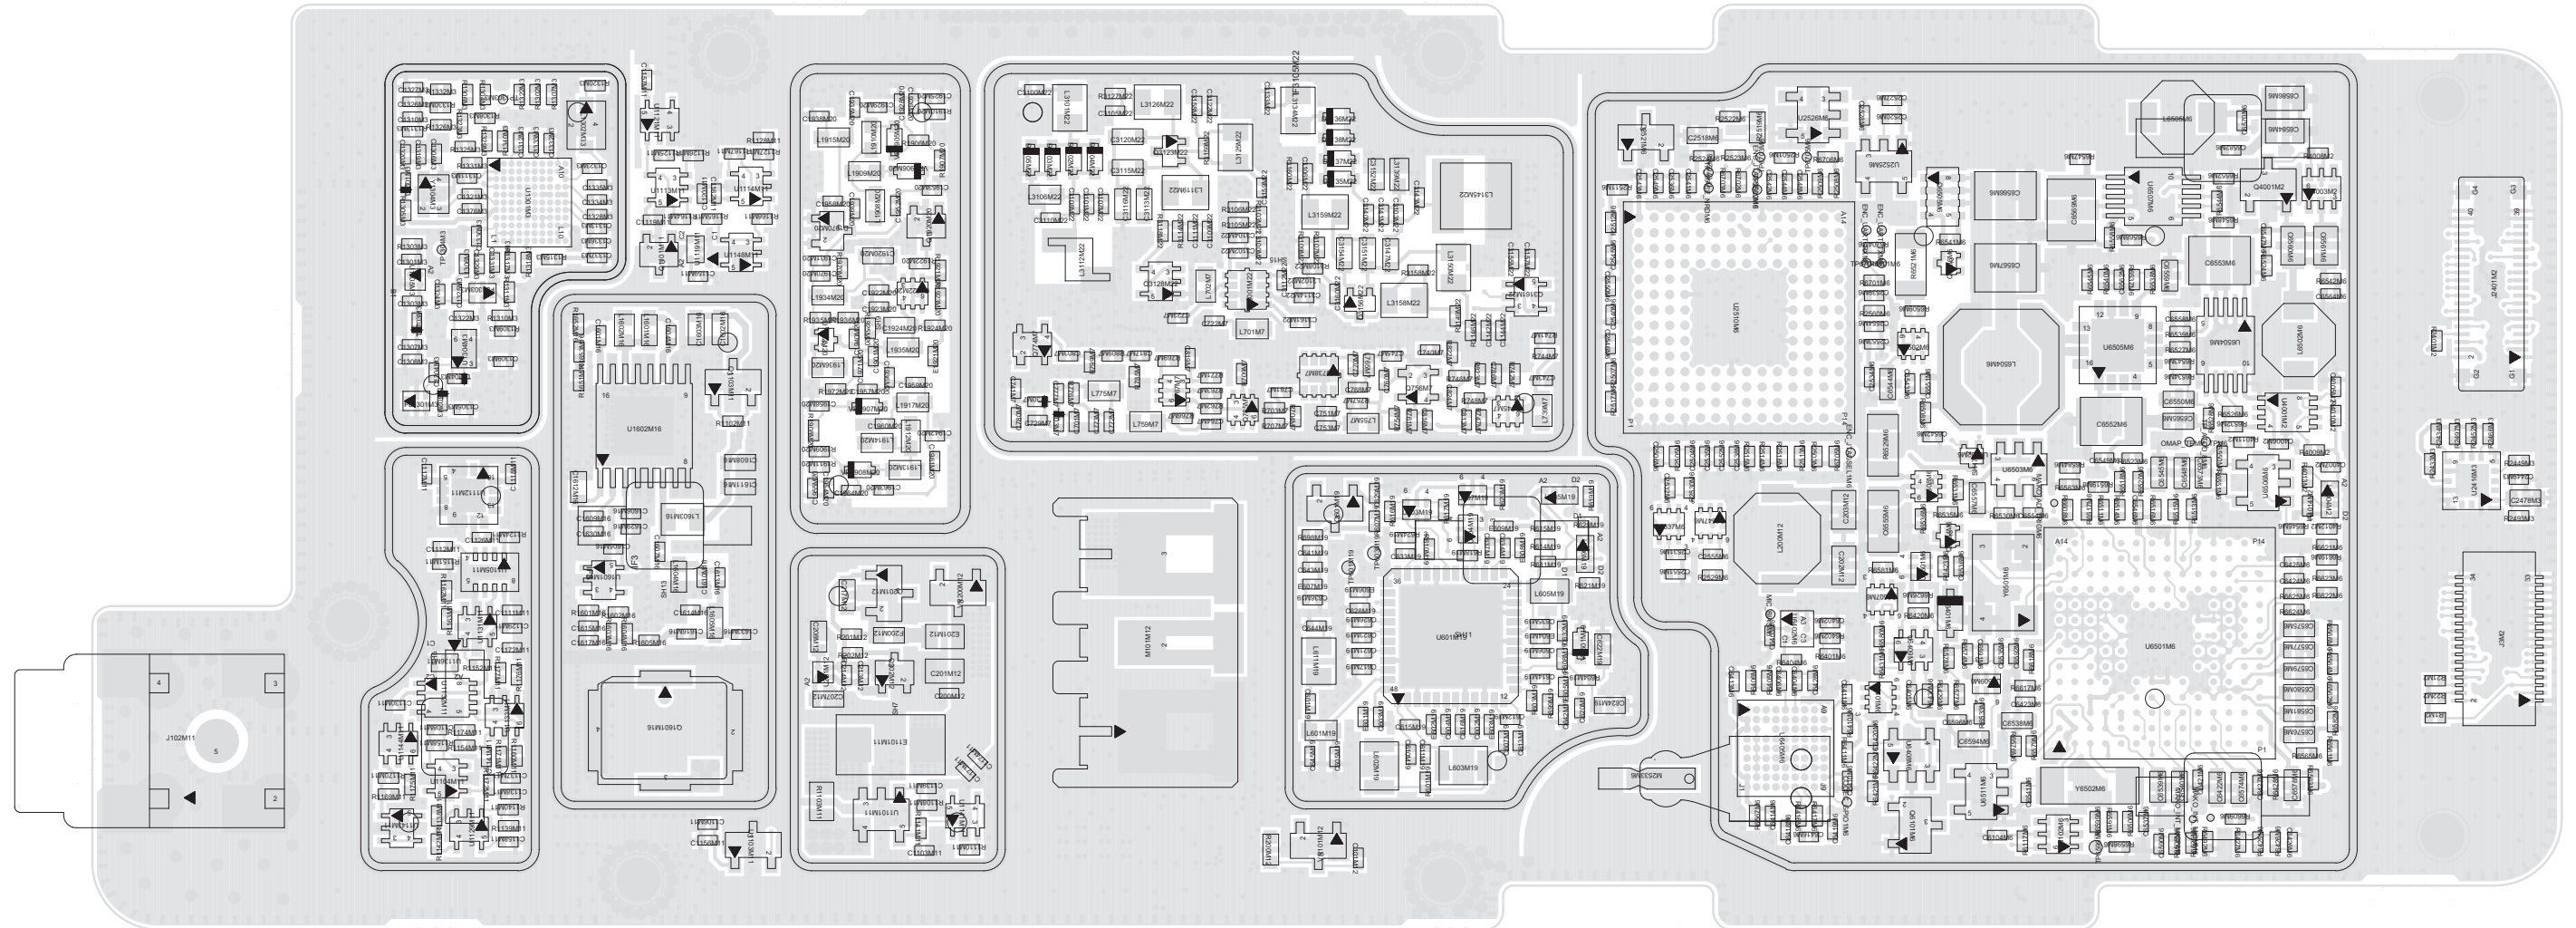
Transceiver (RF) Board Layout – Bottom Side
